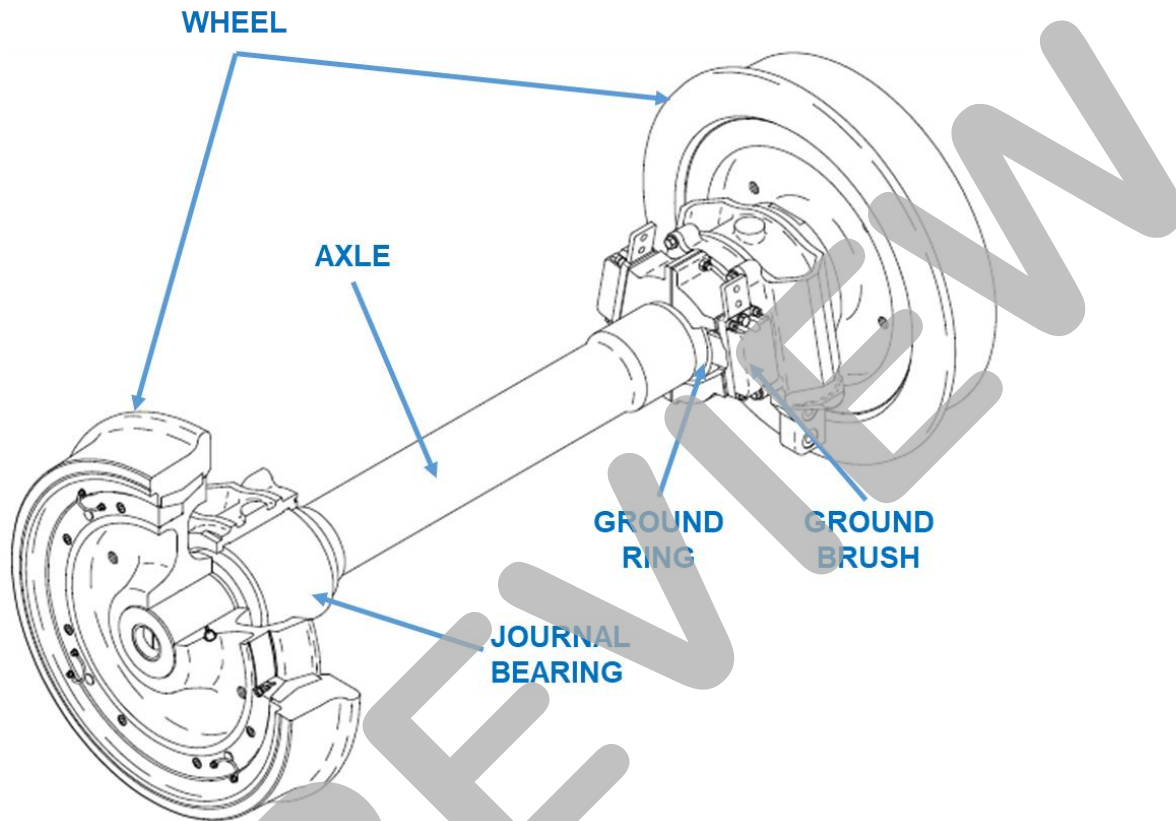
Motor Truck Wheelset Assembly on Powered Truck –Courtesy VTA
